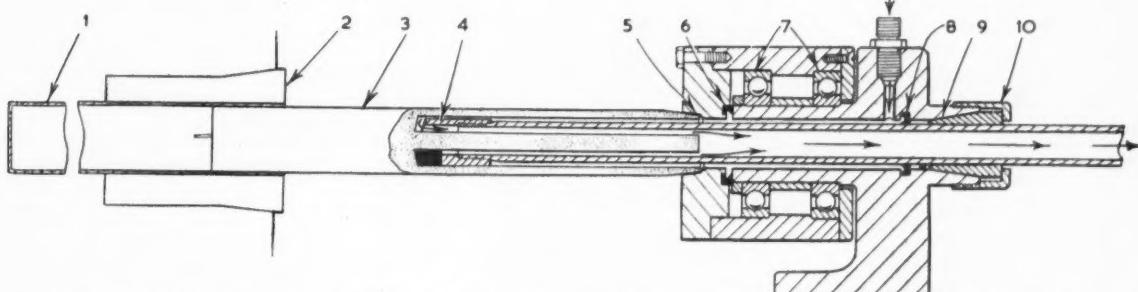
Section through the Heller-designed oil pressure-head for the trepan-boring operation. A steel tube is fitted inside the collet to prevent oil from discharging through the headstock spindle
